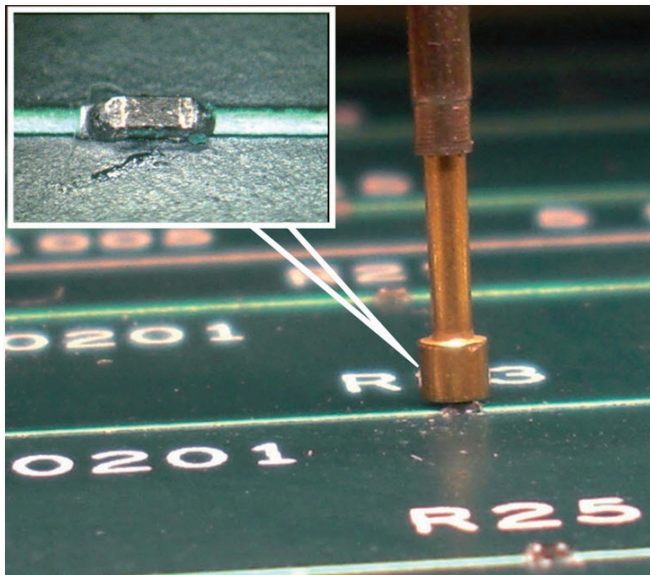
Test Access Component (TAC) used to electrical gain access on PCB trace.
